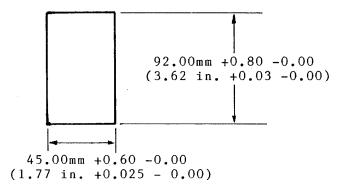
PANEL CUT-OUT DIMENSIONS
